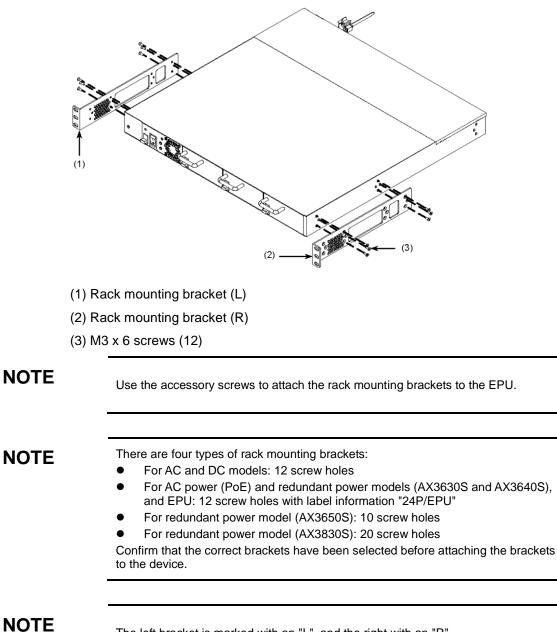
Attaching the rack mounting brackets (50 mm adjustment)
